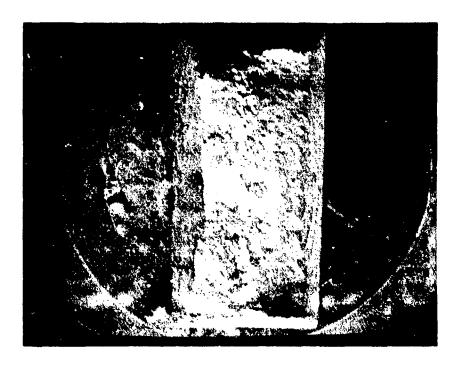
Tensile fracture surface of A-607 steel, 11x.
